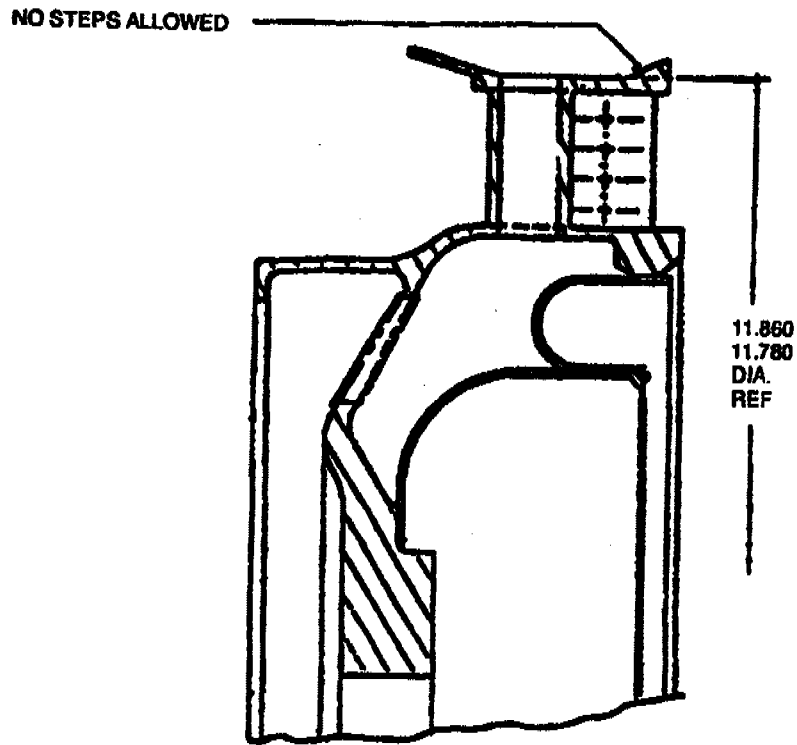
Machining of Forward Portion of Outer Shroud.
